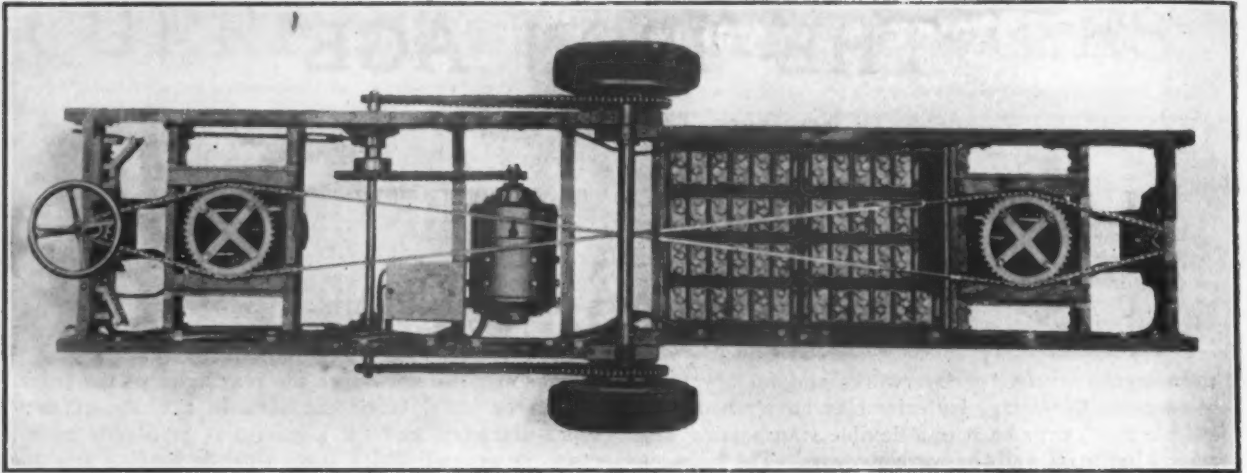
Top View of a Standard Four-Wheel Truck, with Platform Removed.
